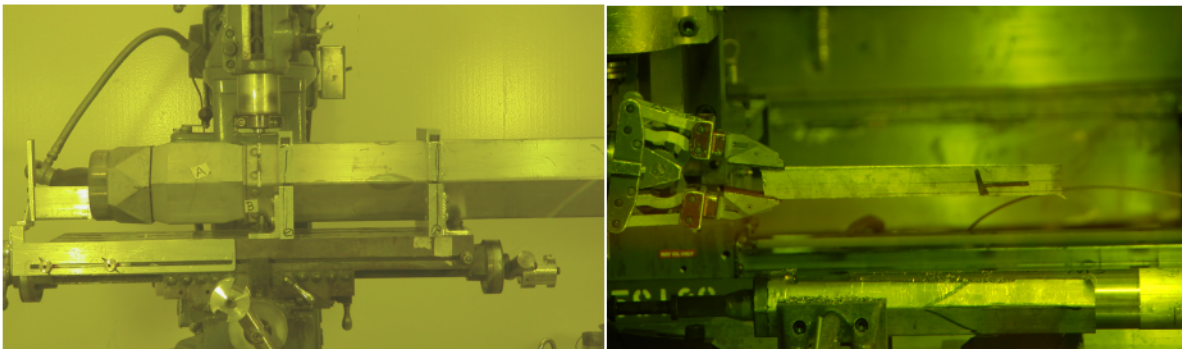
Images of hexagonal duct being machined prior to removal from HFEF.
